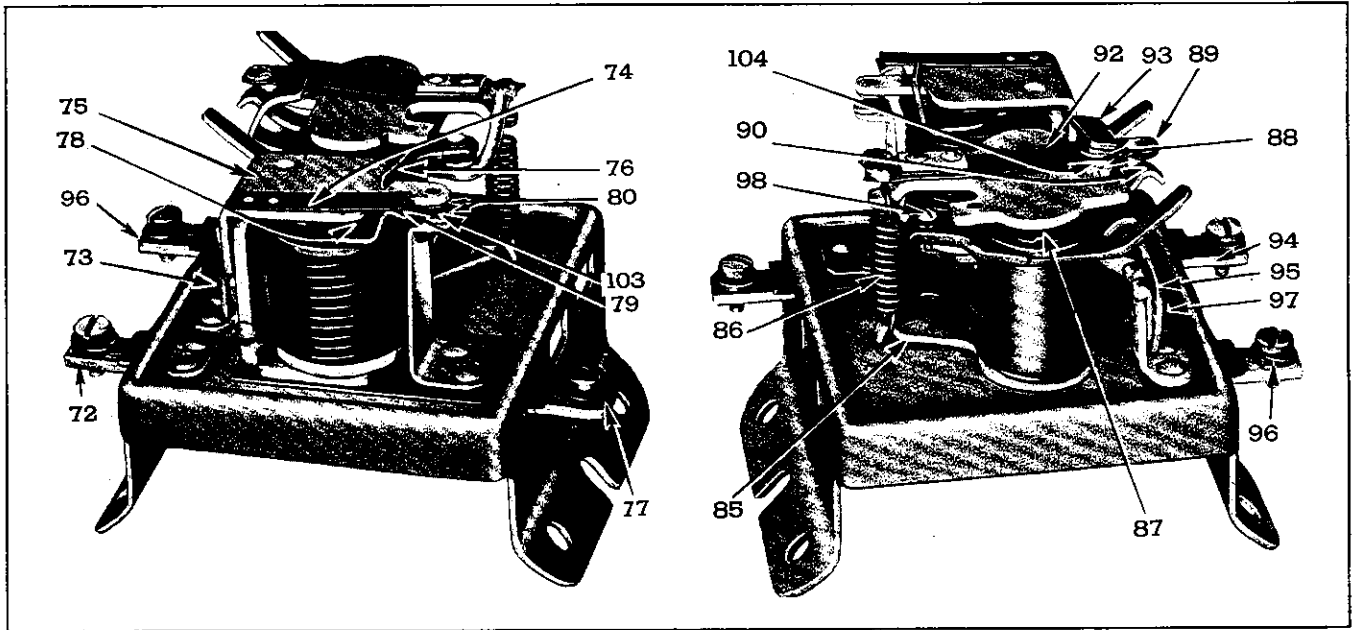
Step-Voltage Control Assembly Showing Details of Cut-Out Relay (LEFT) and Step-Voltage Control (RIGHT).
